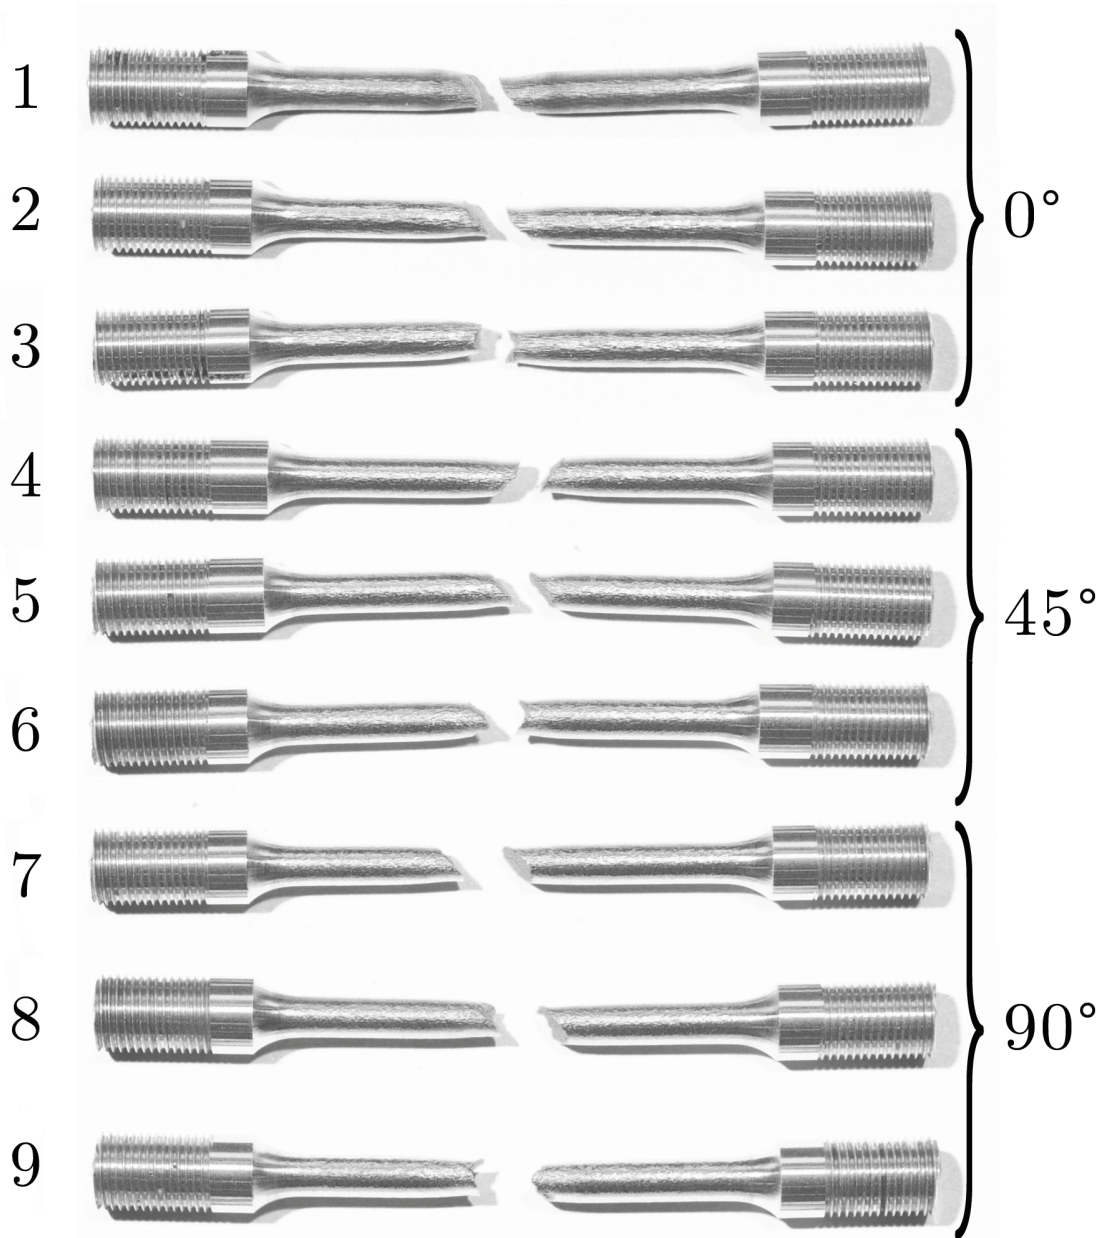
Tensile specimens post fracture for all AA6070-T4 tests.
